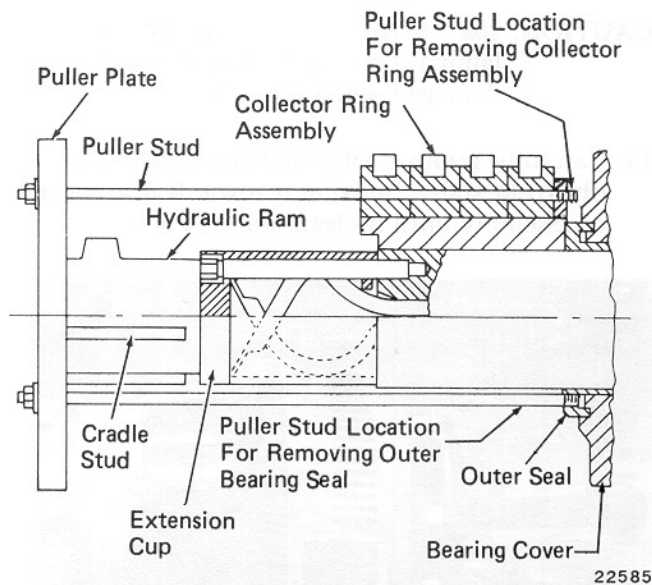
Collector Ring And Bearing Outer Seal Removal
